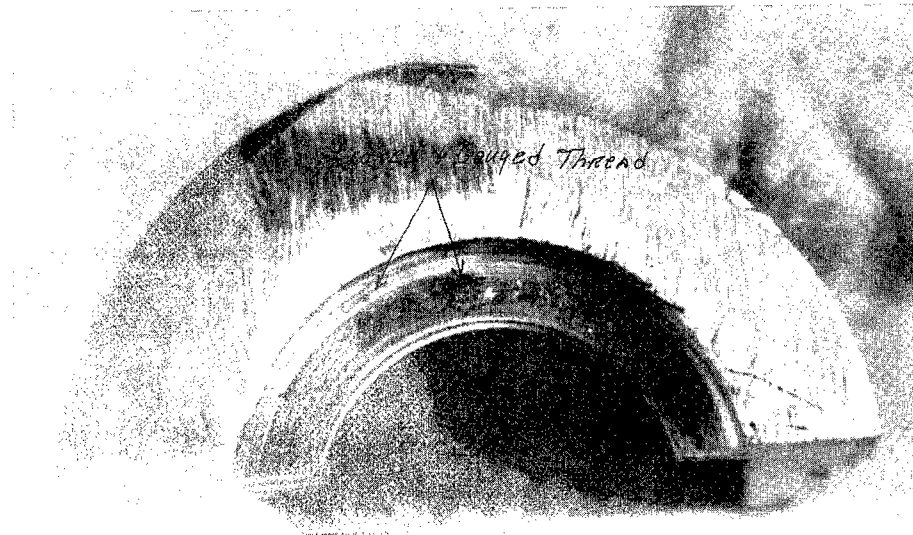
Scored threads of UH-1 tail rotor control quill. Damage caused by sand and other foreign particles.
